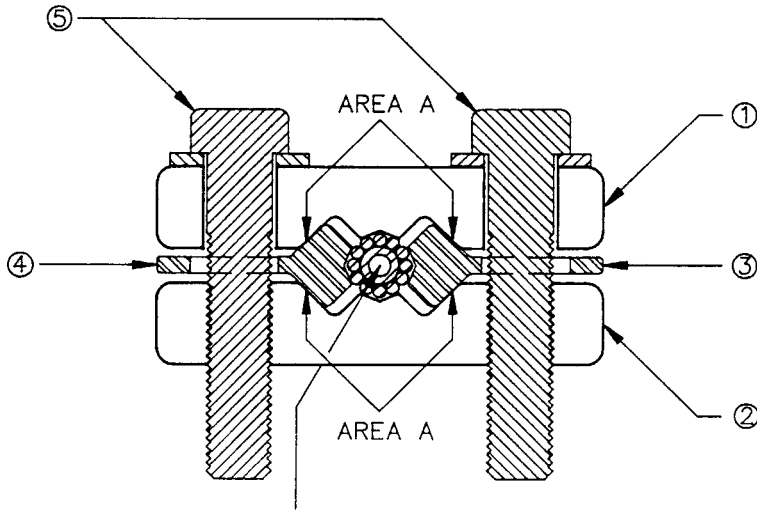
shows a cross-sectional view of the range-taking clamping mechanism which is used in our Fiber Optic Dead End and suspension Clamps. Four clamping members (1,2,3 & 4) are secured with bolts (5). As the bolts are tightened, clamping members (1) and (2) move closer together in the direction parallel to the center line of the bolts.
